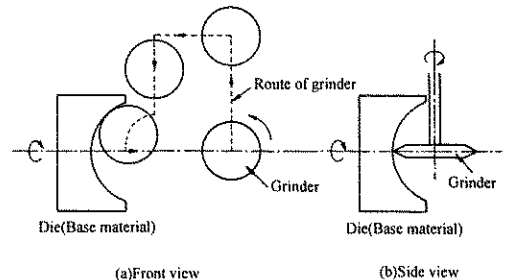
Machining process of press-molding die for aspherical glass lens.
